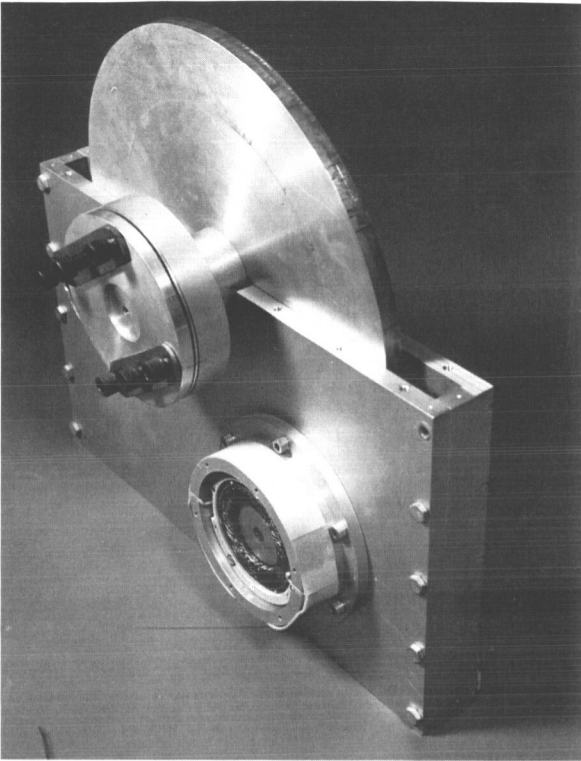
Elevation motor mount. Idler bearing shaft is concealed by elevation trunnion. Gimbal ring bolts to trunnion with the six Allen head screws. Thrust bearings (not shown) prevent drive disc from touching sides of box.
